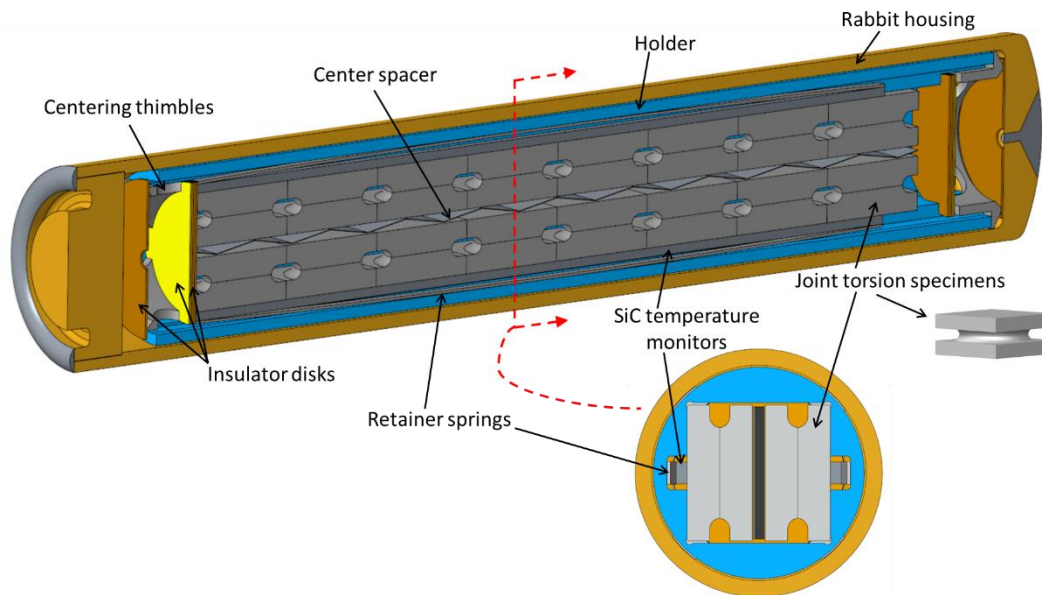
Capsule design concept for irradiating SiC-based joint torsion specimens.
